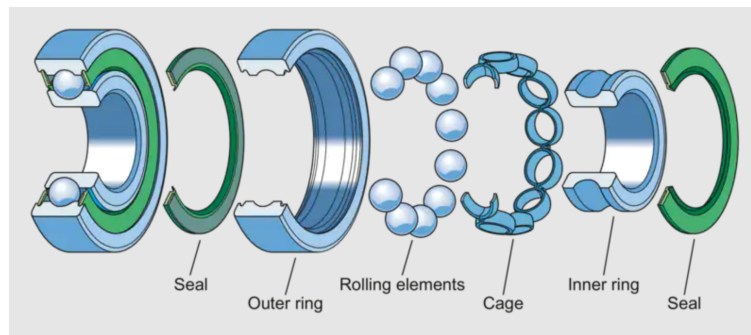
Ball bearing components (SKF\_Components\_and\_materials, 2023)
